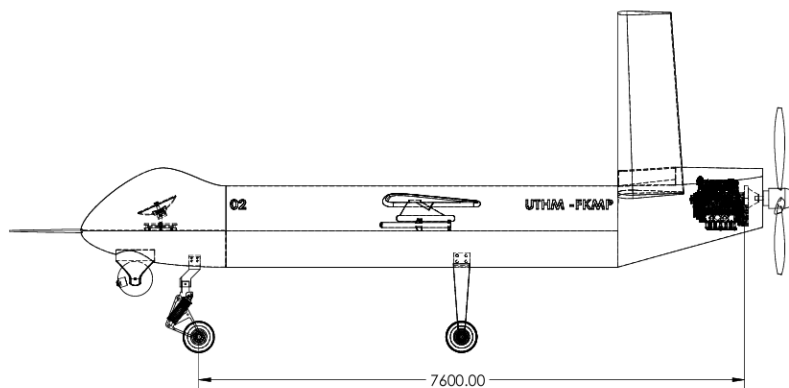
Rear-mounted TEI-PD170 engine and pusher propeller configuration
